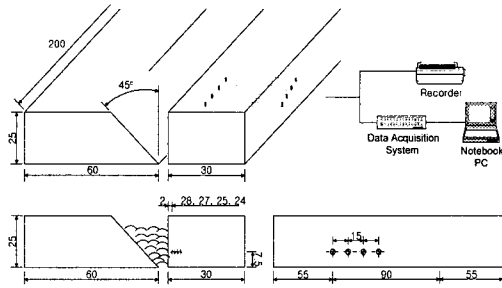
Schematic of the weld specimen and measuring locations
